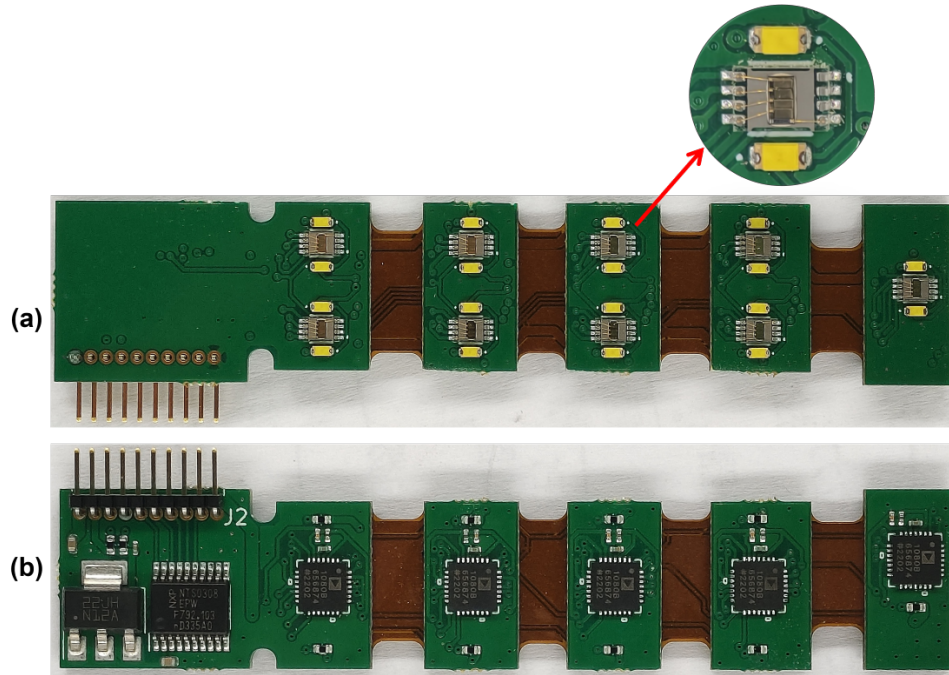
Fabricated rigid-flex PCB: (a) top side with ADPD2140 sensors and LEDs with a zoomed view of one unit, (b) bottom side showing flex interconnects.
